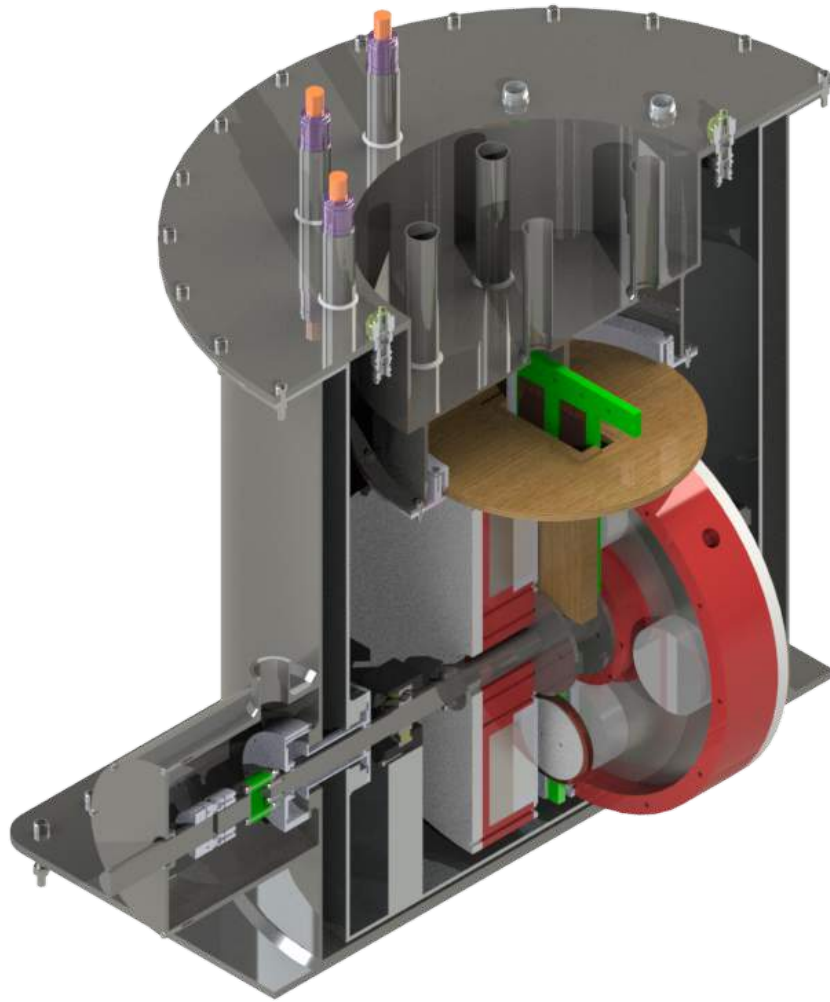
CAD model of the final design A.C. loss measurement platform with a cutaway view to expose the isolation chamber, rotor discs and magnets, isolation vessel and sealing methodology.
